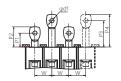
NXM-400~800 rear wiring overall and installation dimension
